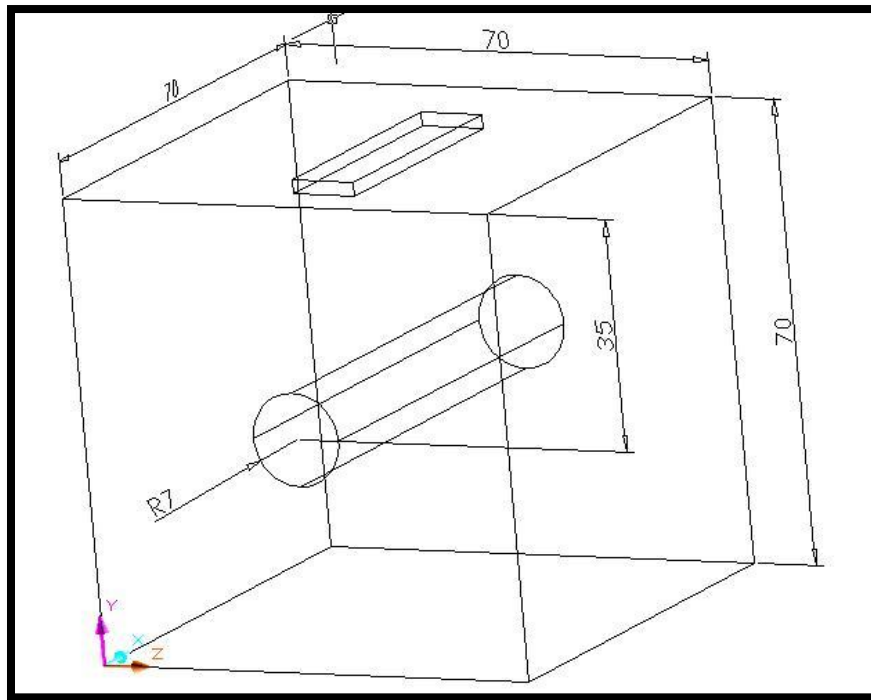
3D view for Dimension of Circular shape cross-sectional cooling channels
